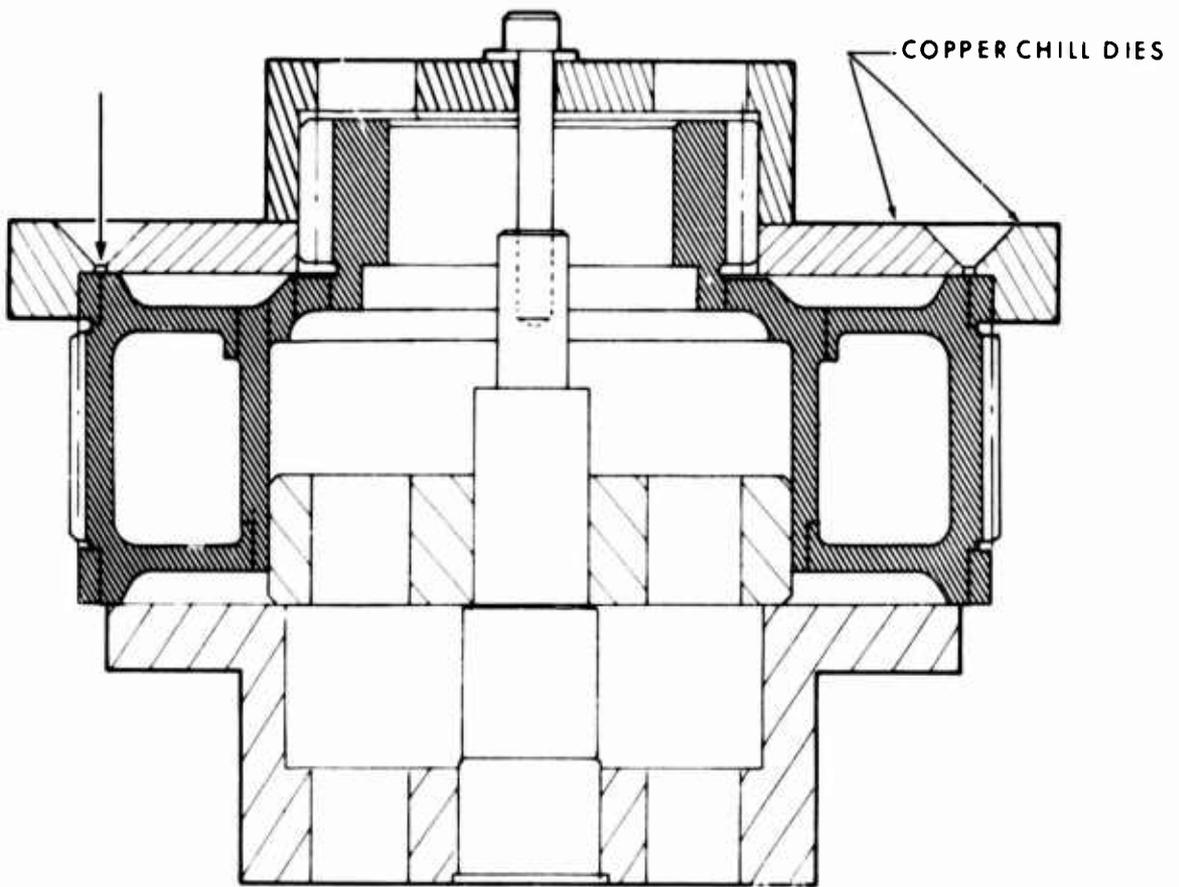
Welding Fixture for Second-Row Pinion Lower Roller Weld.
